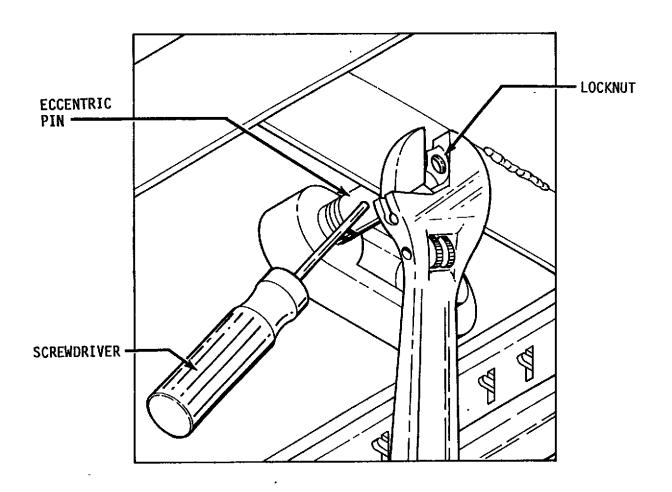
Adjusting Blade Frames Using Eccentric Pins
